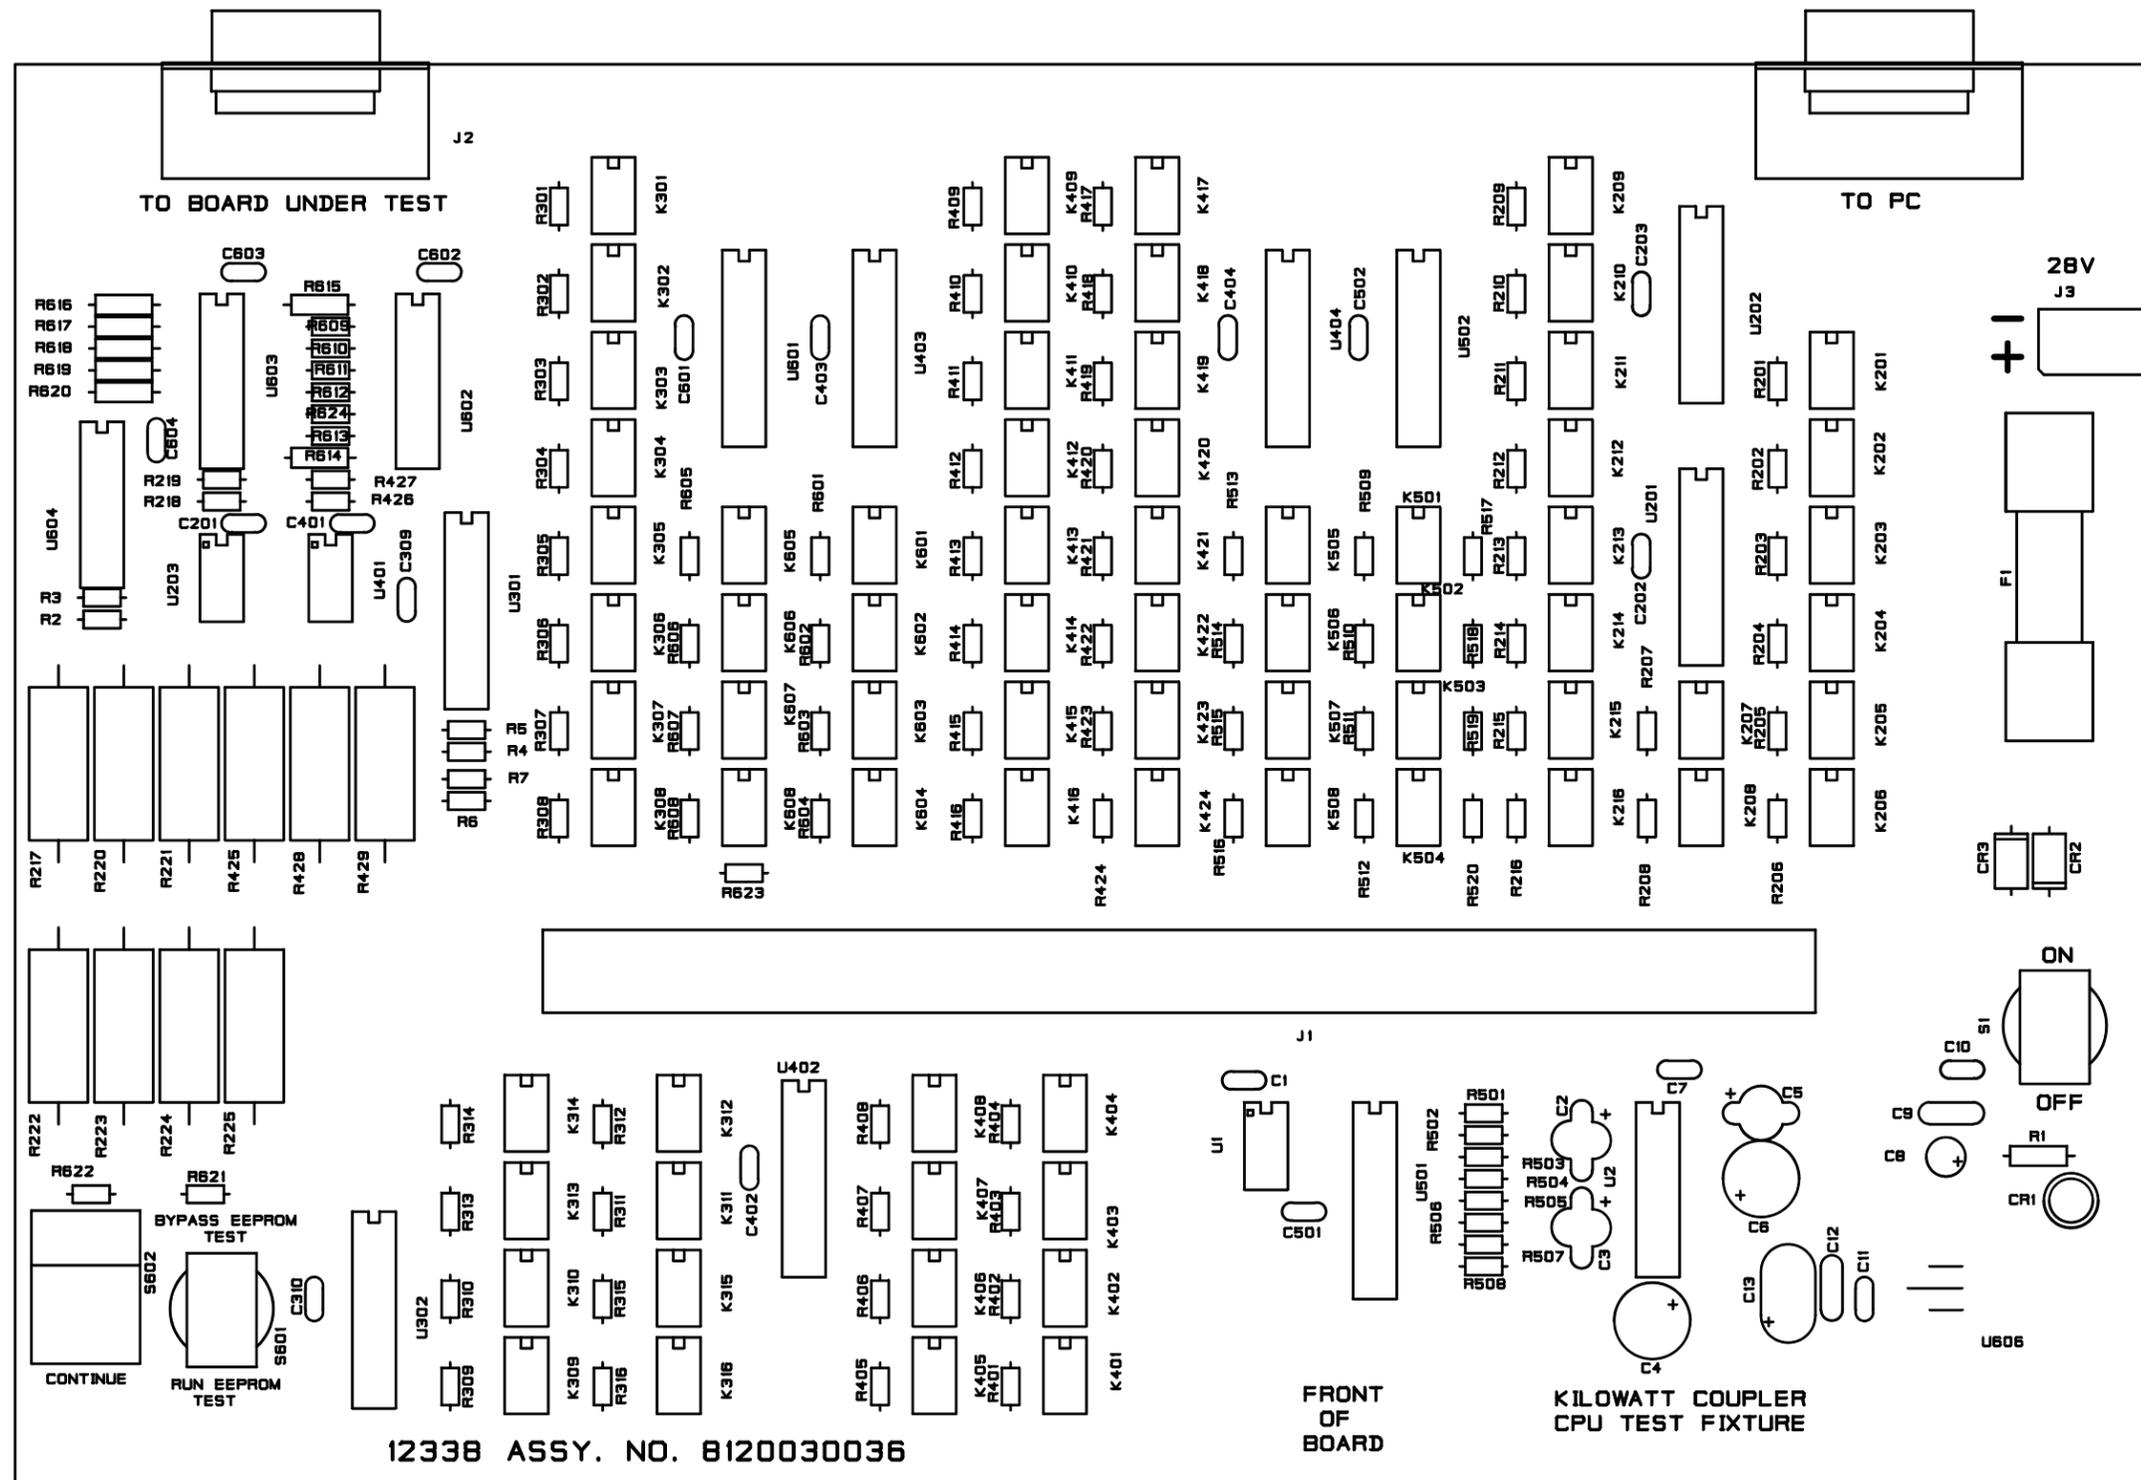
PC Assembly, Test Fixture, CU-9150 CPU
